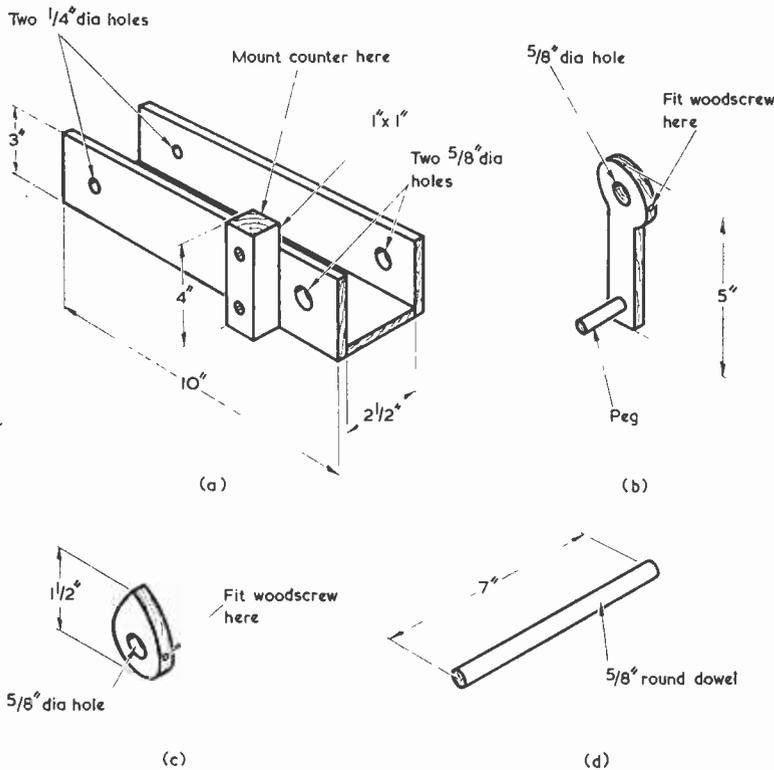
The main parts of a home-constructed coil-winder. The frame appears in (a), the winding handle in (b), the eccentric wheel for actuating the counter in (c), and the dowel in (d)
